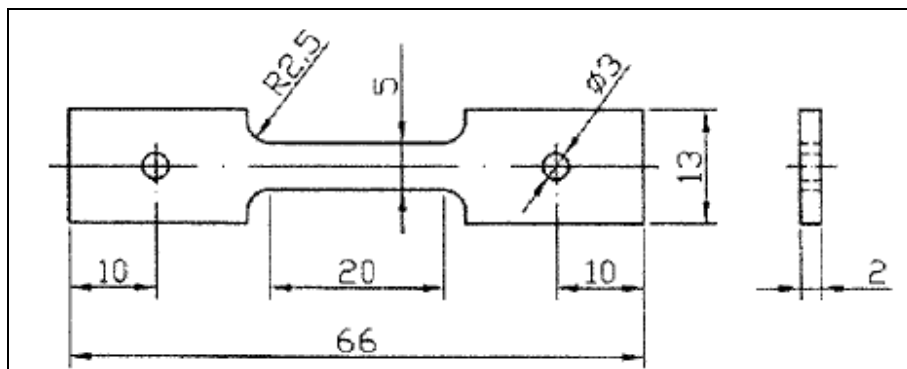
Specimen shape and dimension for tensile test [Song et al 2003]
